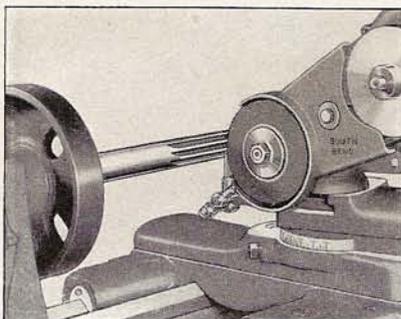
Sharpening a Reamer with Grinding Attachment.
